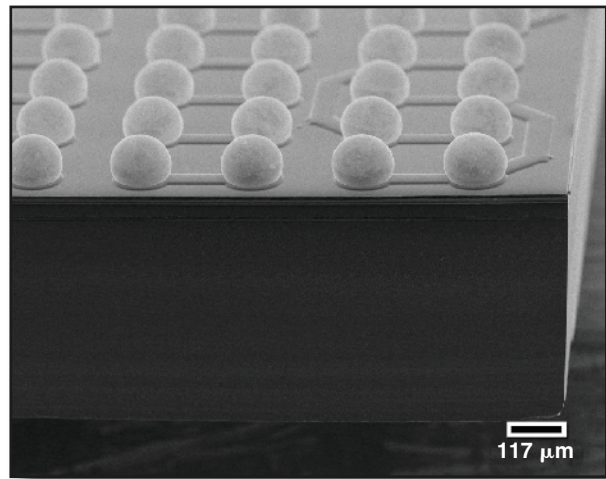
SEM photomicrograph of a solder ball array with $50 \mu\text{m}$ of silicon on the handle before flip-chip attachment. The handle is chemically dissolved away after the solder reflow process is completed.
